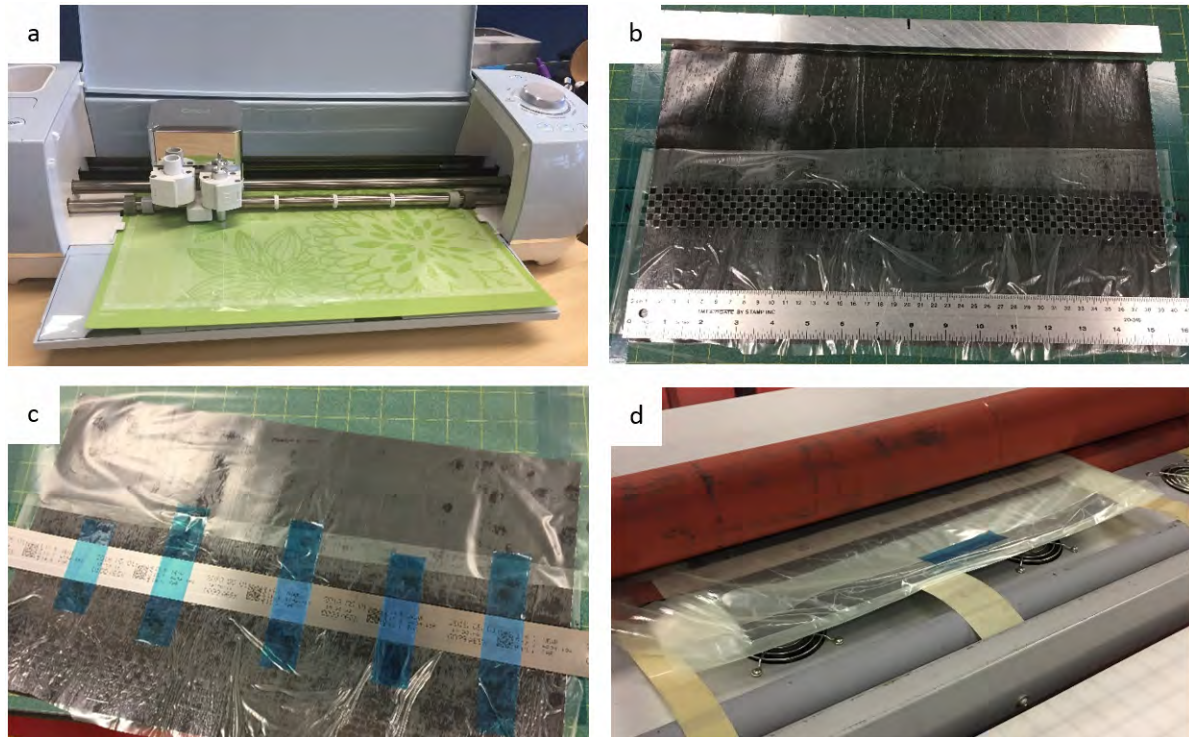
The process for manufacturing patterned VACNT interleaves onto prepreg: (a) Initially, patterns were cut out of $25\ \mu\text{m}$ thick release film cutting using a desktop CNC machine on an adhesive cutting board. (b) Masks were positioned and placed over the exposed prepreg, before (c) the VACNT film was placed over the top; (d) The system was then fed through a heated laminator to transfer the nanotubes through to the exposed prepreg.
